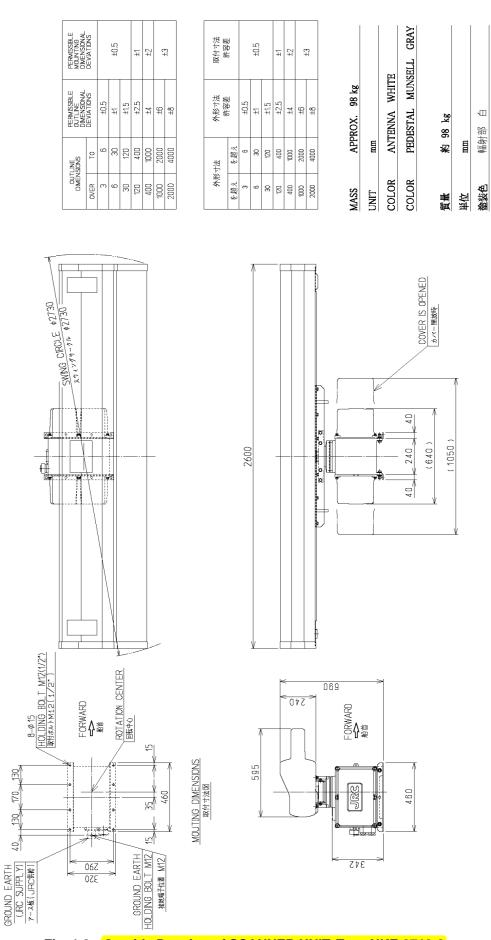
Outside Drawing of SCANNER UNIT, Type NKE-1064
